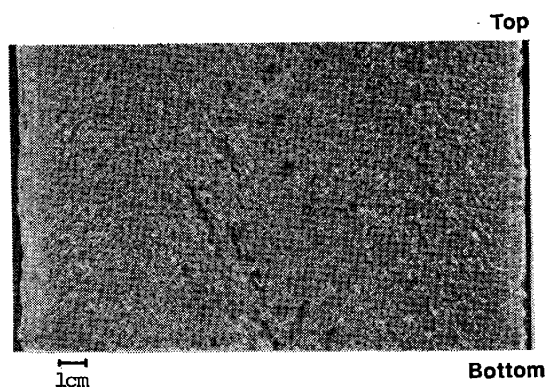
Macro structure of longitudinal section of ingot with alternating rotative stirring at final stage of solidification.
